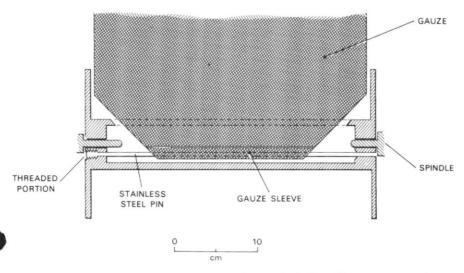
Plan view of a gauze supply spool to show method of attaching gauze to spool.
